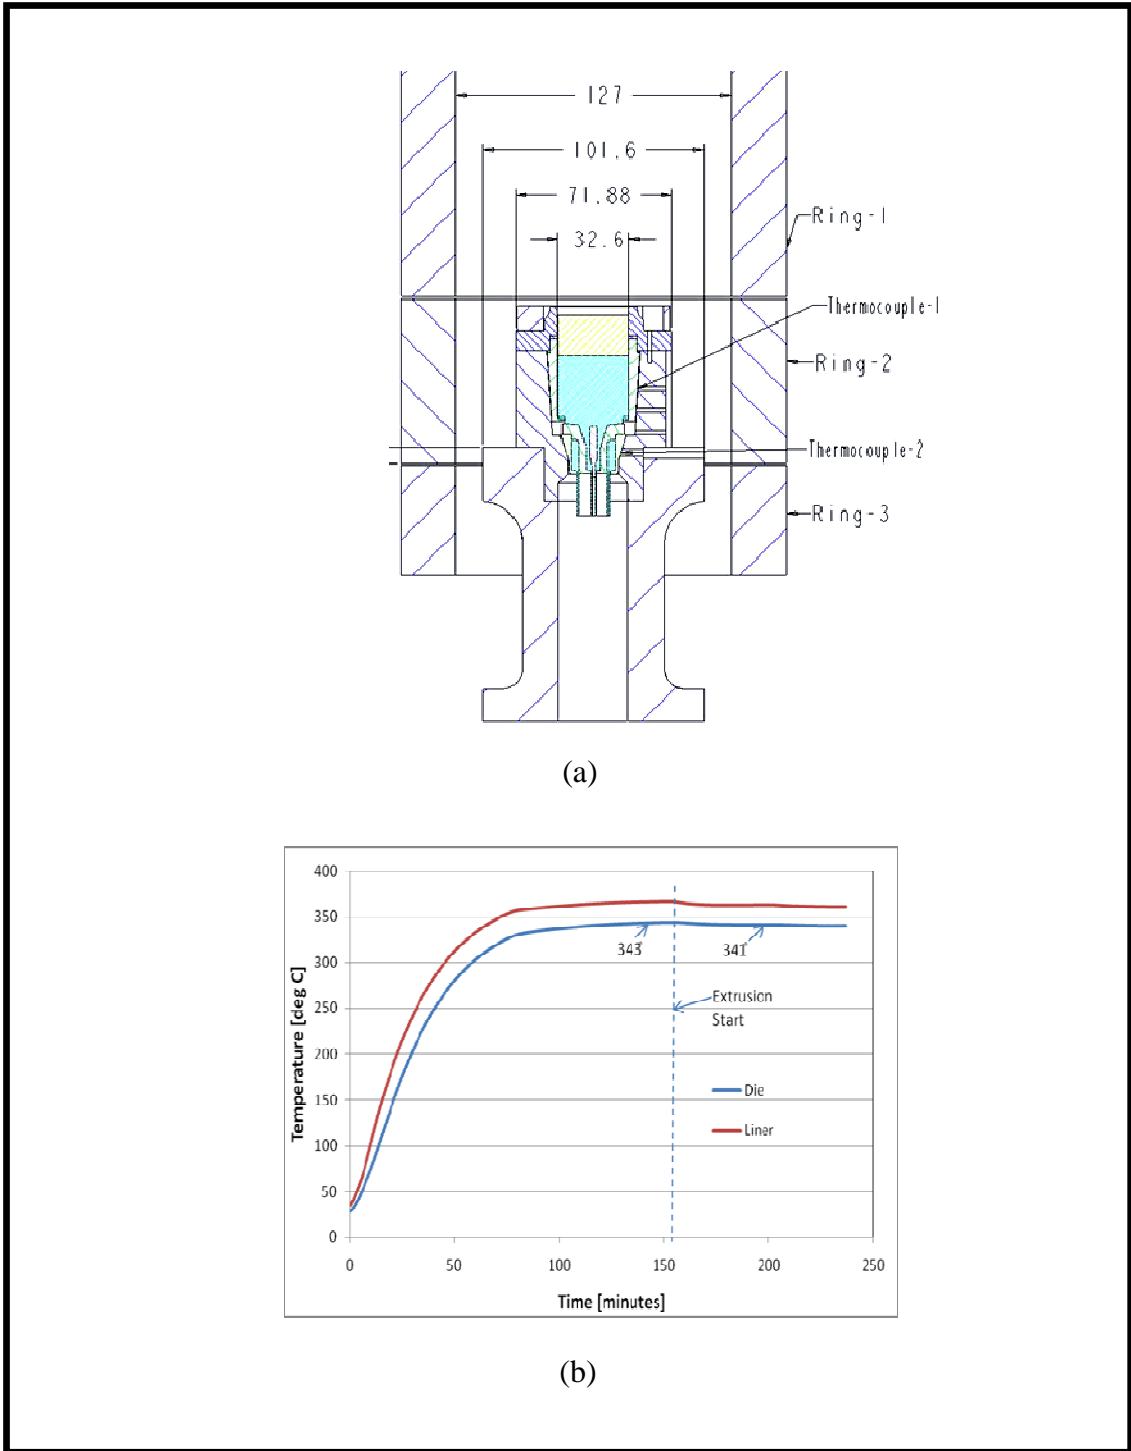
(a) Extrusion die assembly with furnace [12] and (b) a typical temperature distribution in the furnace from the beginning of the billet heating to the end of the extrusion
